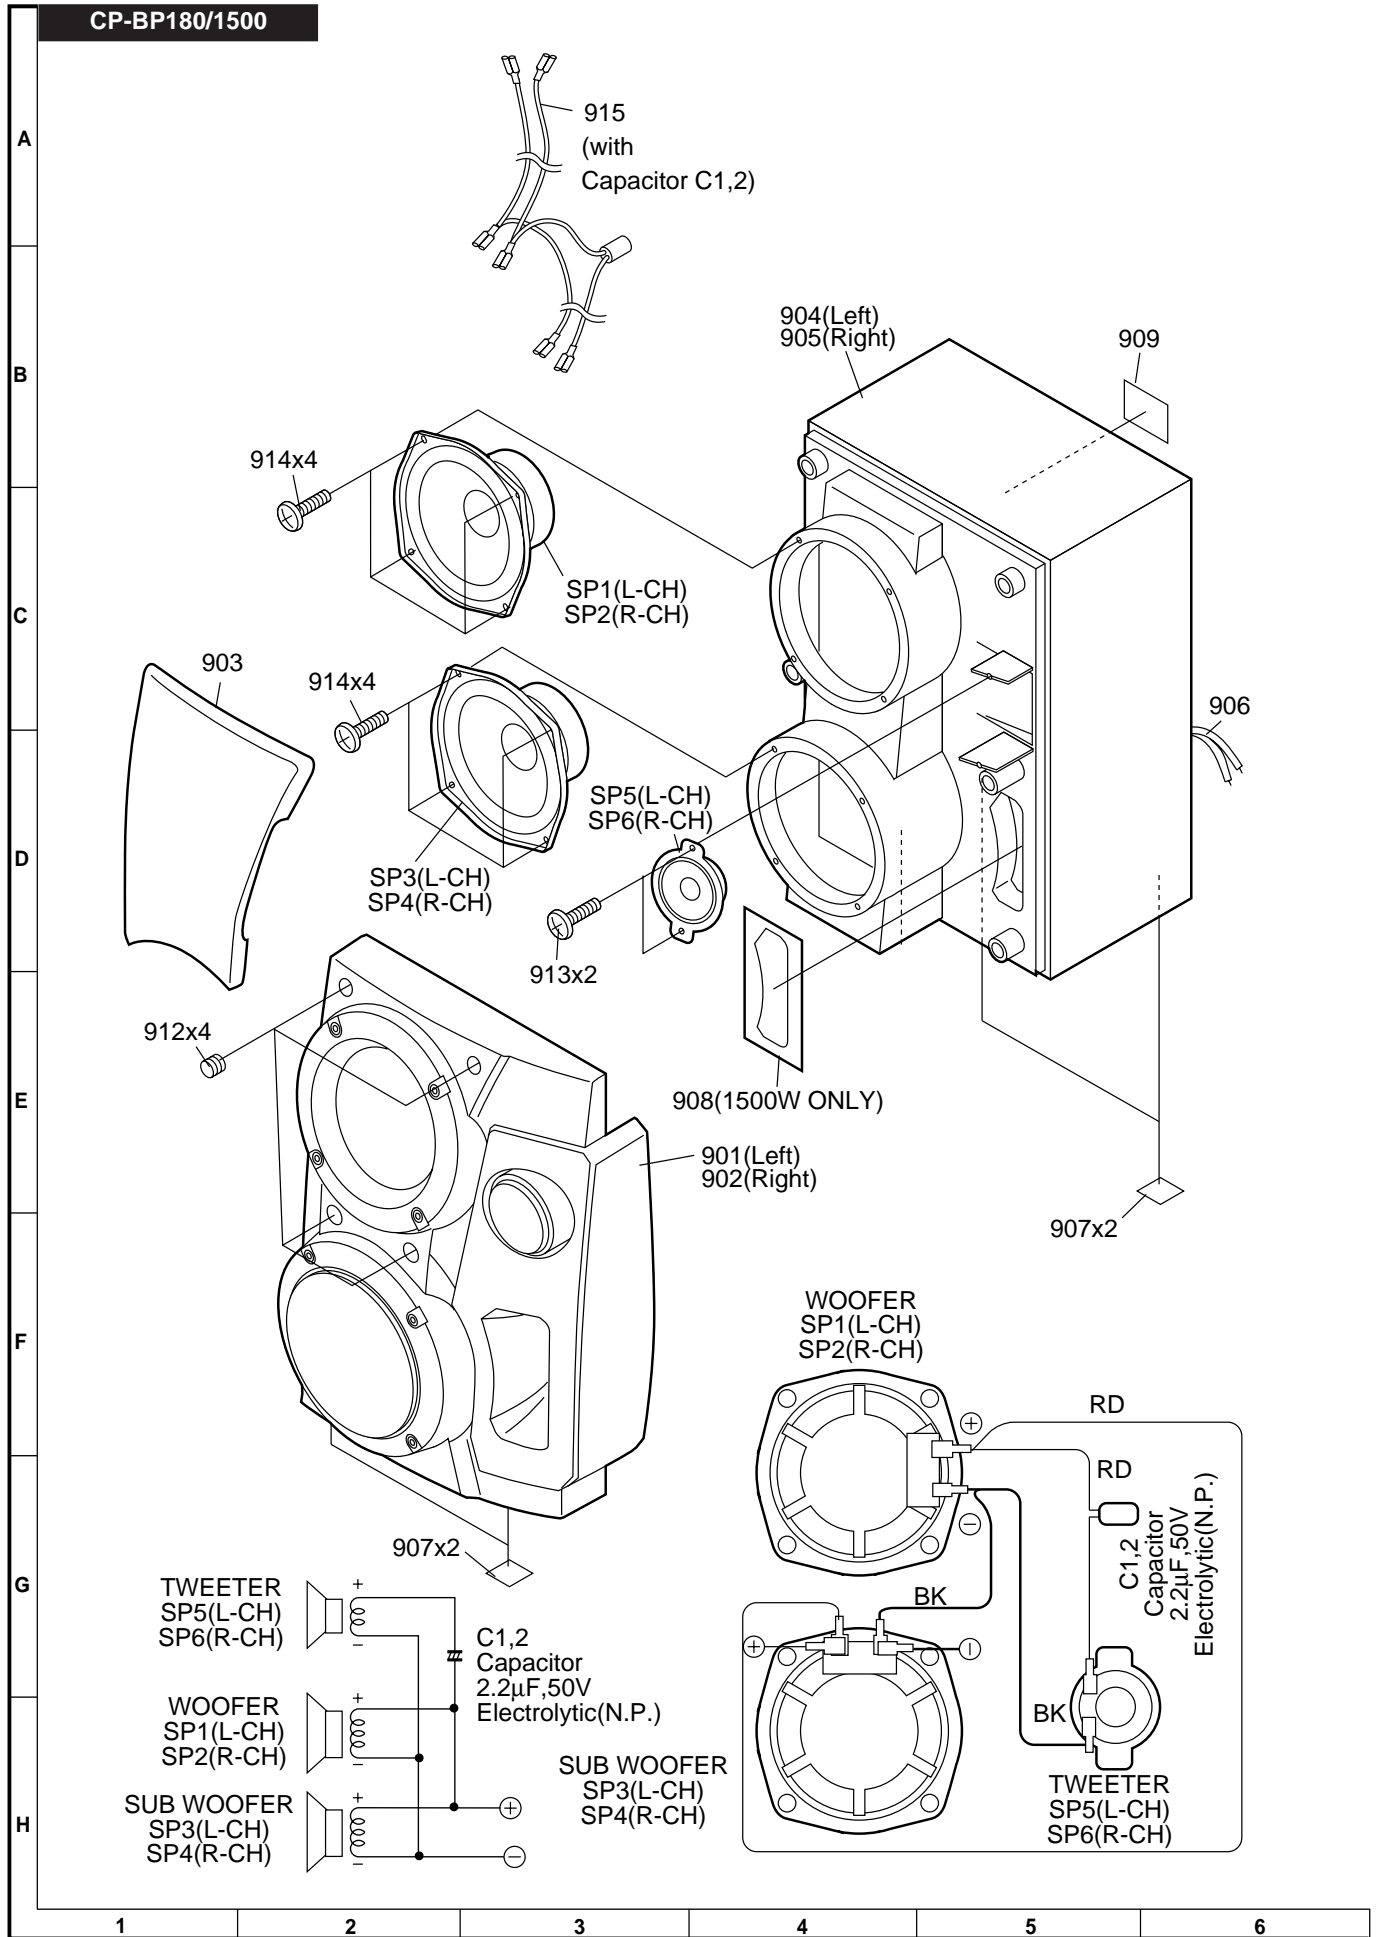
SPEAKER EXPLODED VIEW (1/3)
